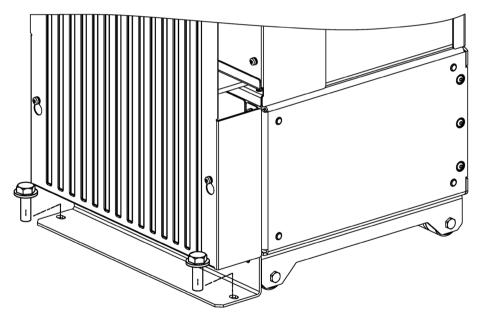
Attaching the mounting bracket (diagram showing an example)
